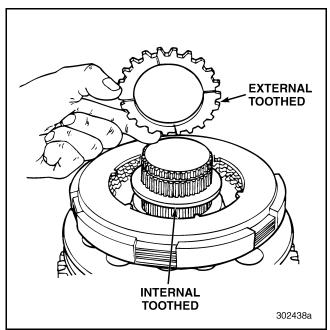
Installing External-Toothed Thrust Washer (T313L21/T318L21 Shown)
